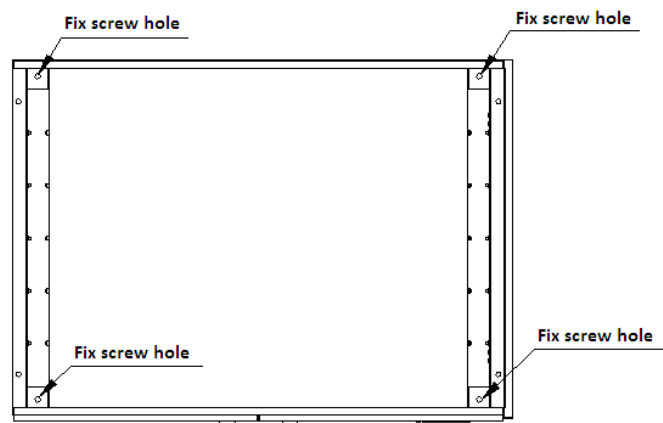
position of fixed bolt hole in 160~600KVA UPS cabinet and pallet
